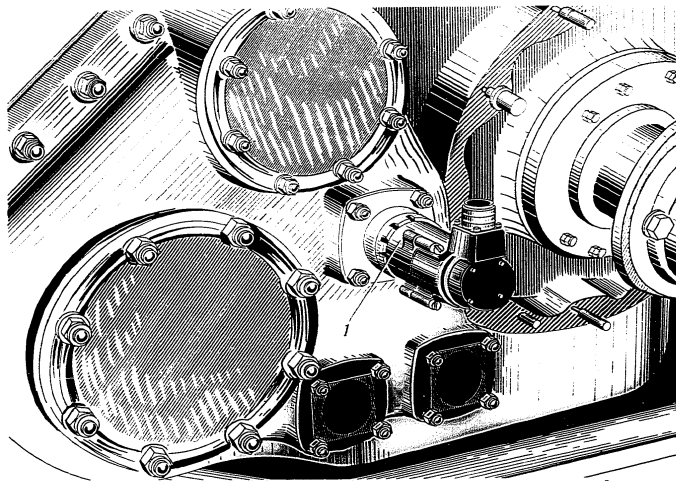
MOUNTING 11-2 TRANSMITTER ON MAIN GEAR BOX HOUSING
